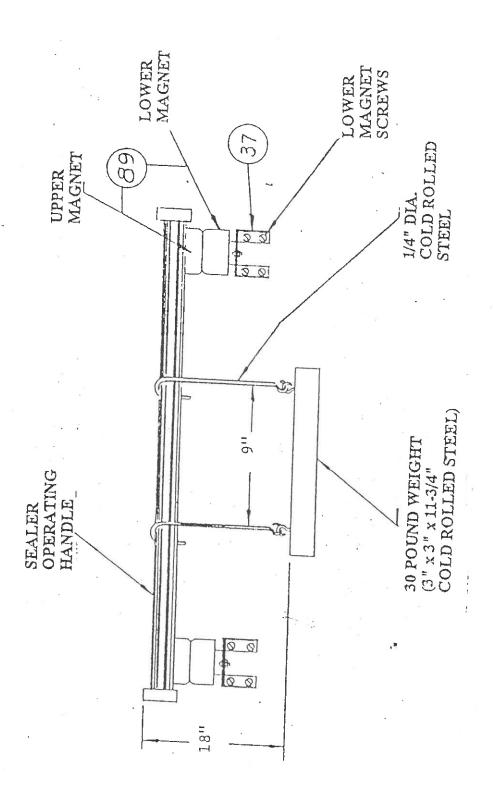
Adjustment of Magna-Lok Sealing Pressure
